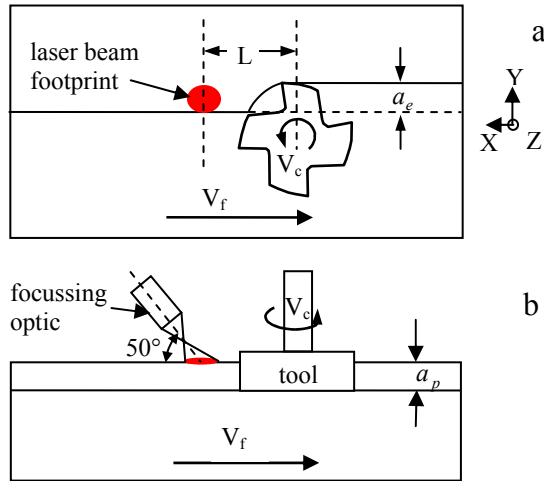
(a) top and (b) front views of laser assisted milling set-up.
